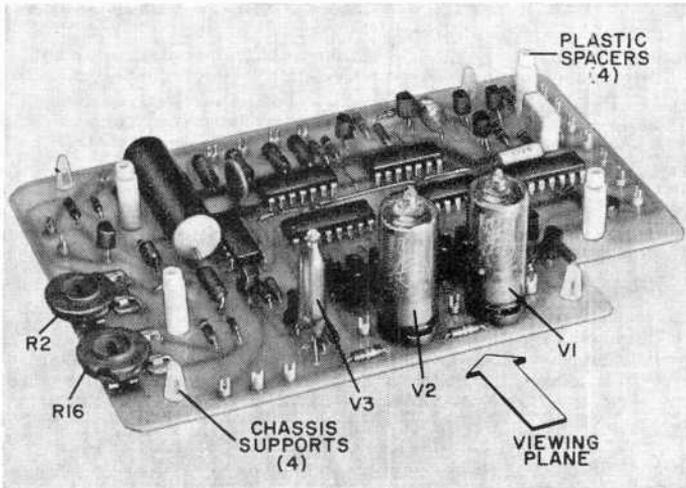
Two sets of spacers are used. One set mounts the board to the chassis while the other supports power supply PC board.
